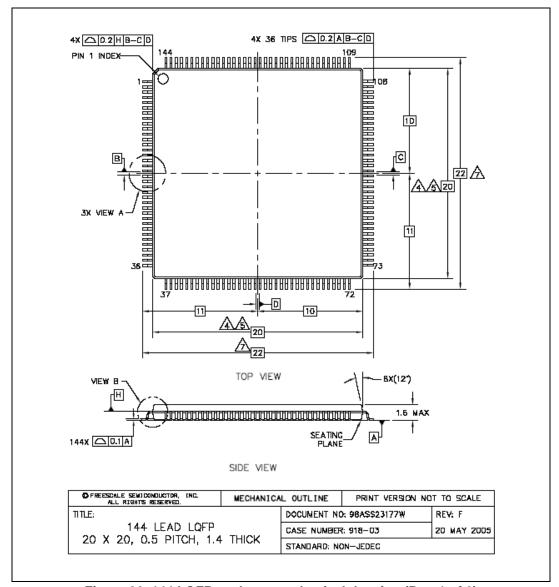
144 LQFP package mechanical drawing (Part 1 of 2)
